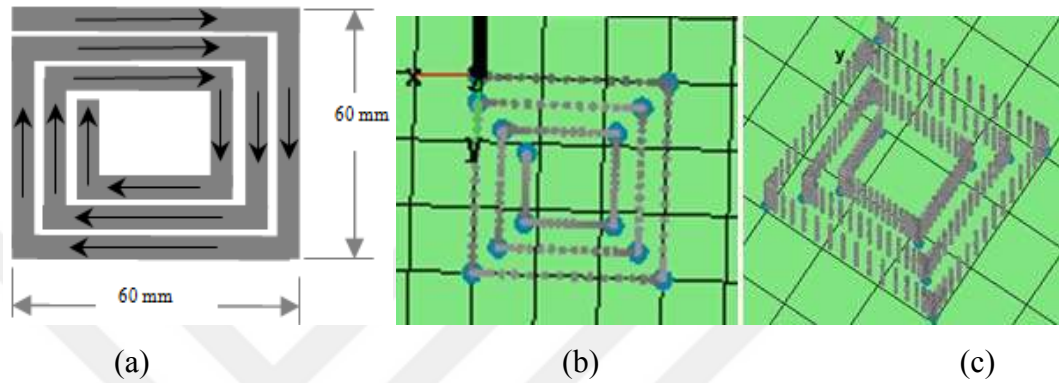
23. Spiral path pattern for hollow filling the rectangular part, (a) spiral path pattern; (b and c) the CAD drawing and layer slices.
